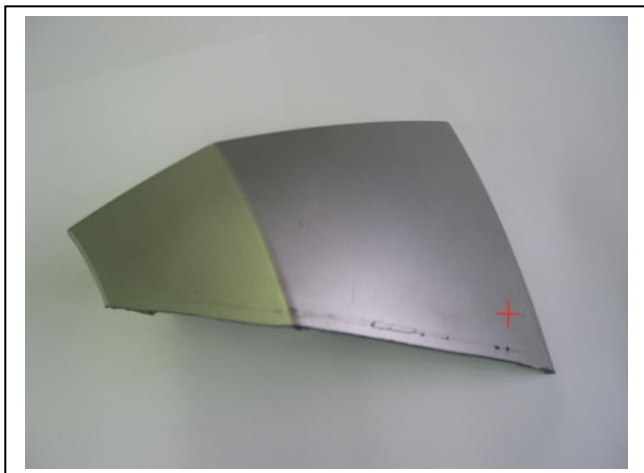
Use template to measure and cut flare to size. Affix to bumper at red crossed point.
